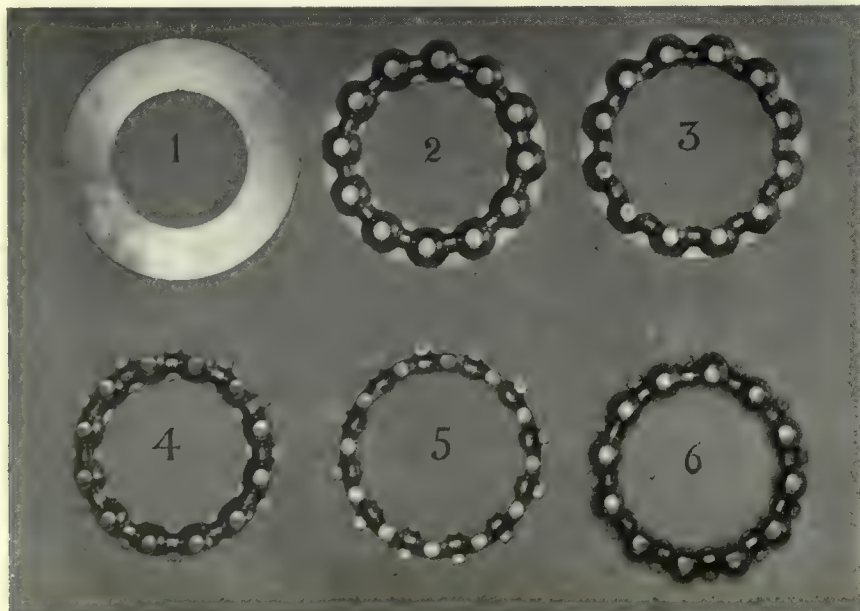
STAMPED PARTS OF PRESSED STEEL BALL CAGE IN PROCESS OF MANUFACTURE.
